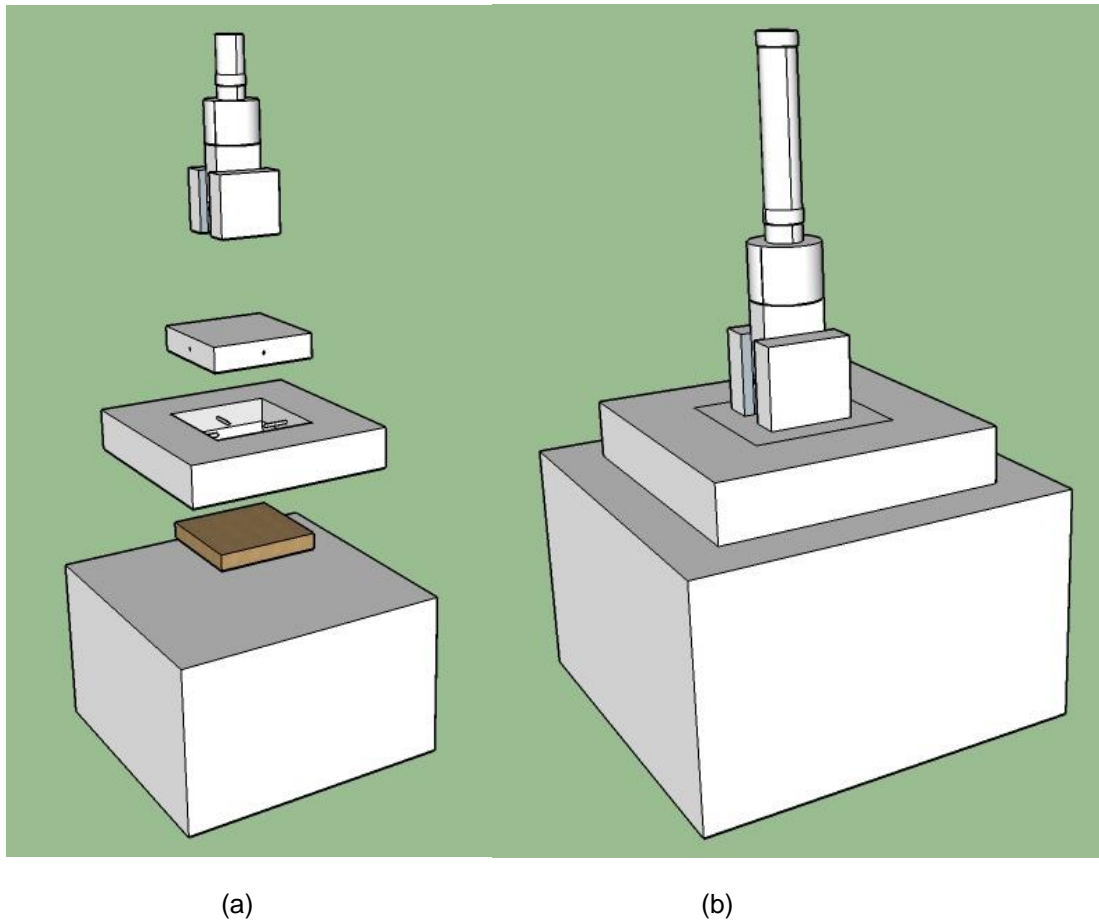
13 Punch test setup (a) exploded view and (b) normal view.
